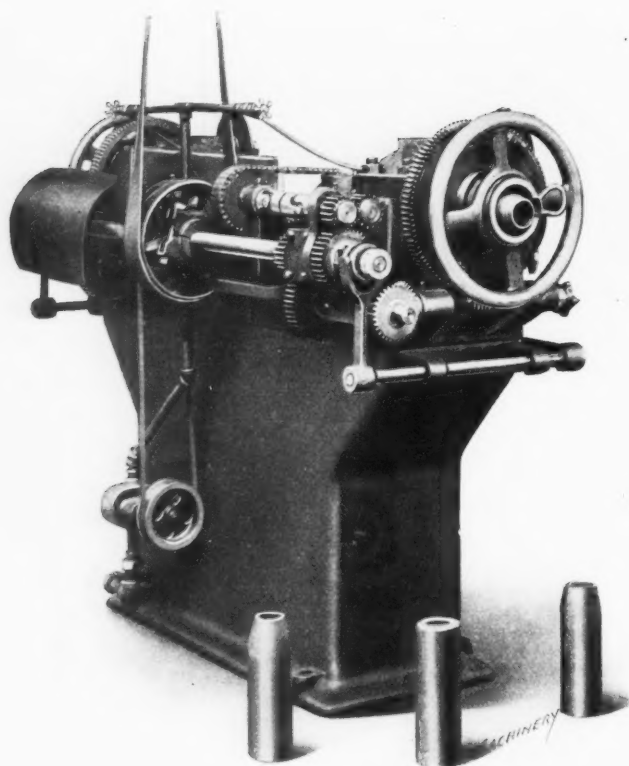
View of Thread Milling Machine illustrating Driving Mechanism for Cutter- and Work-spindles
